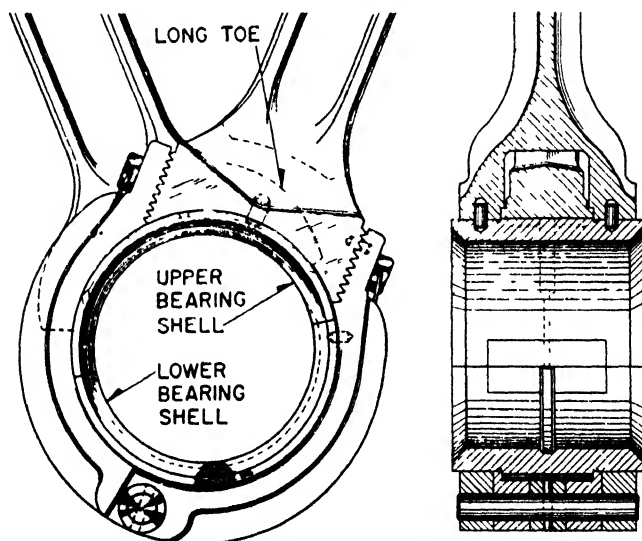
BIG ENDS OF THE "FORK-AND-BLADE TYPE" CONNECTING RODS.
